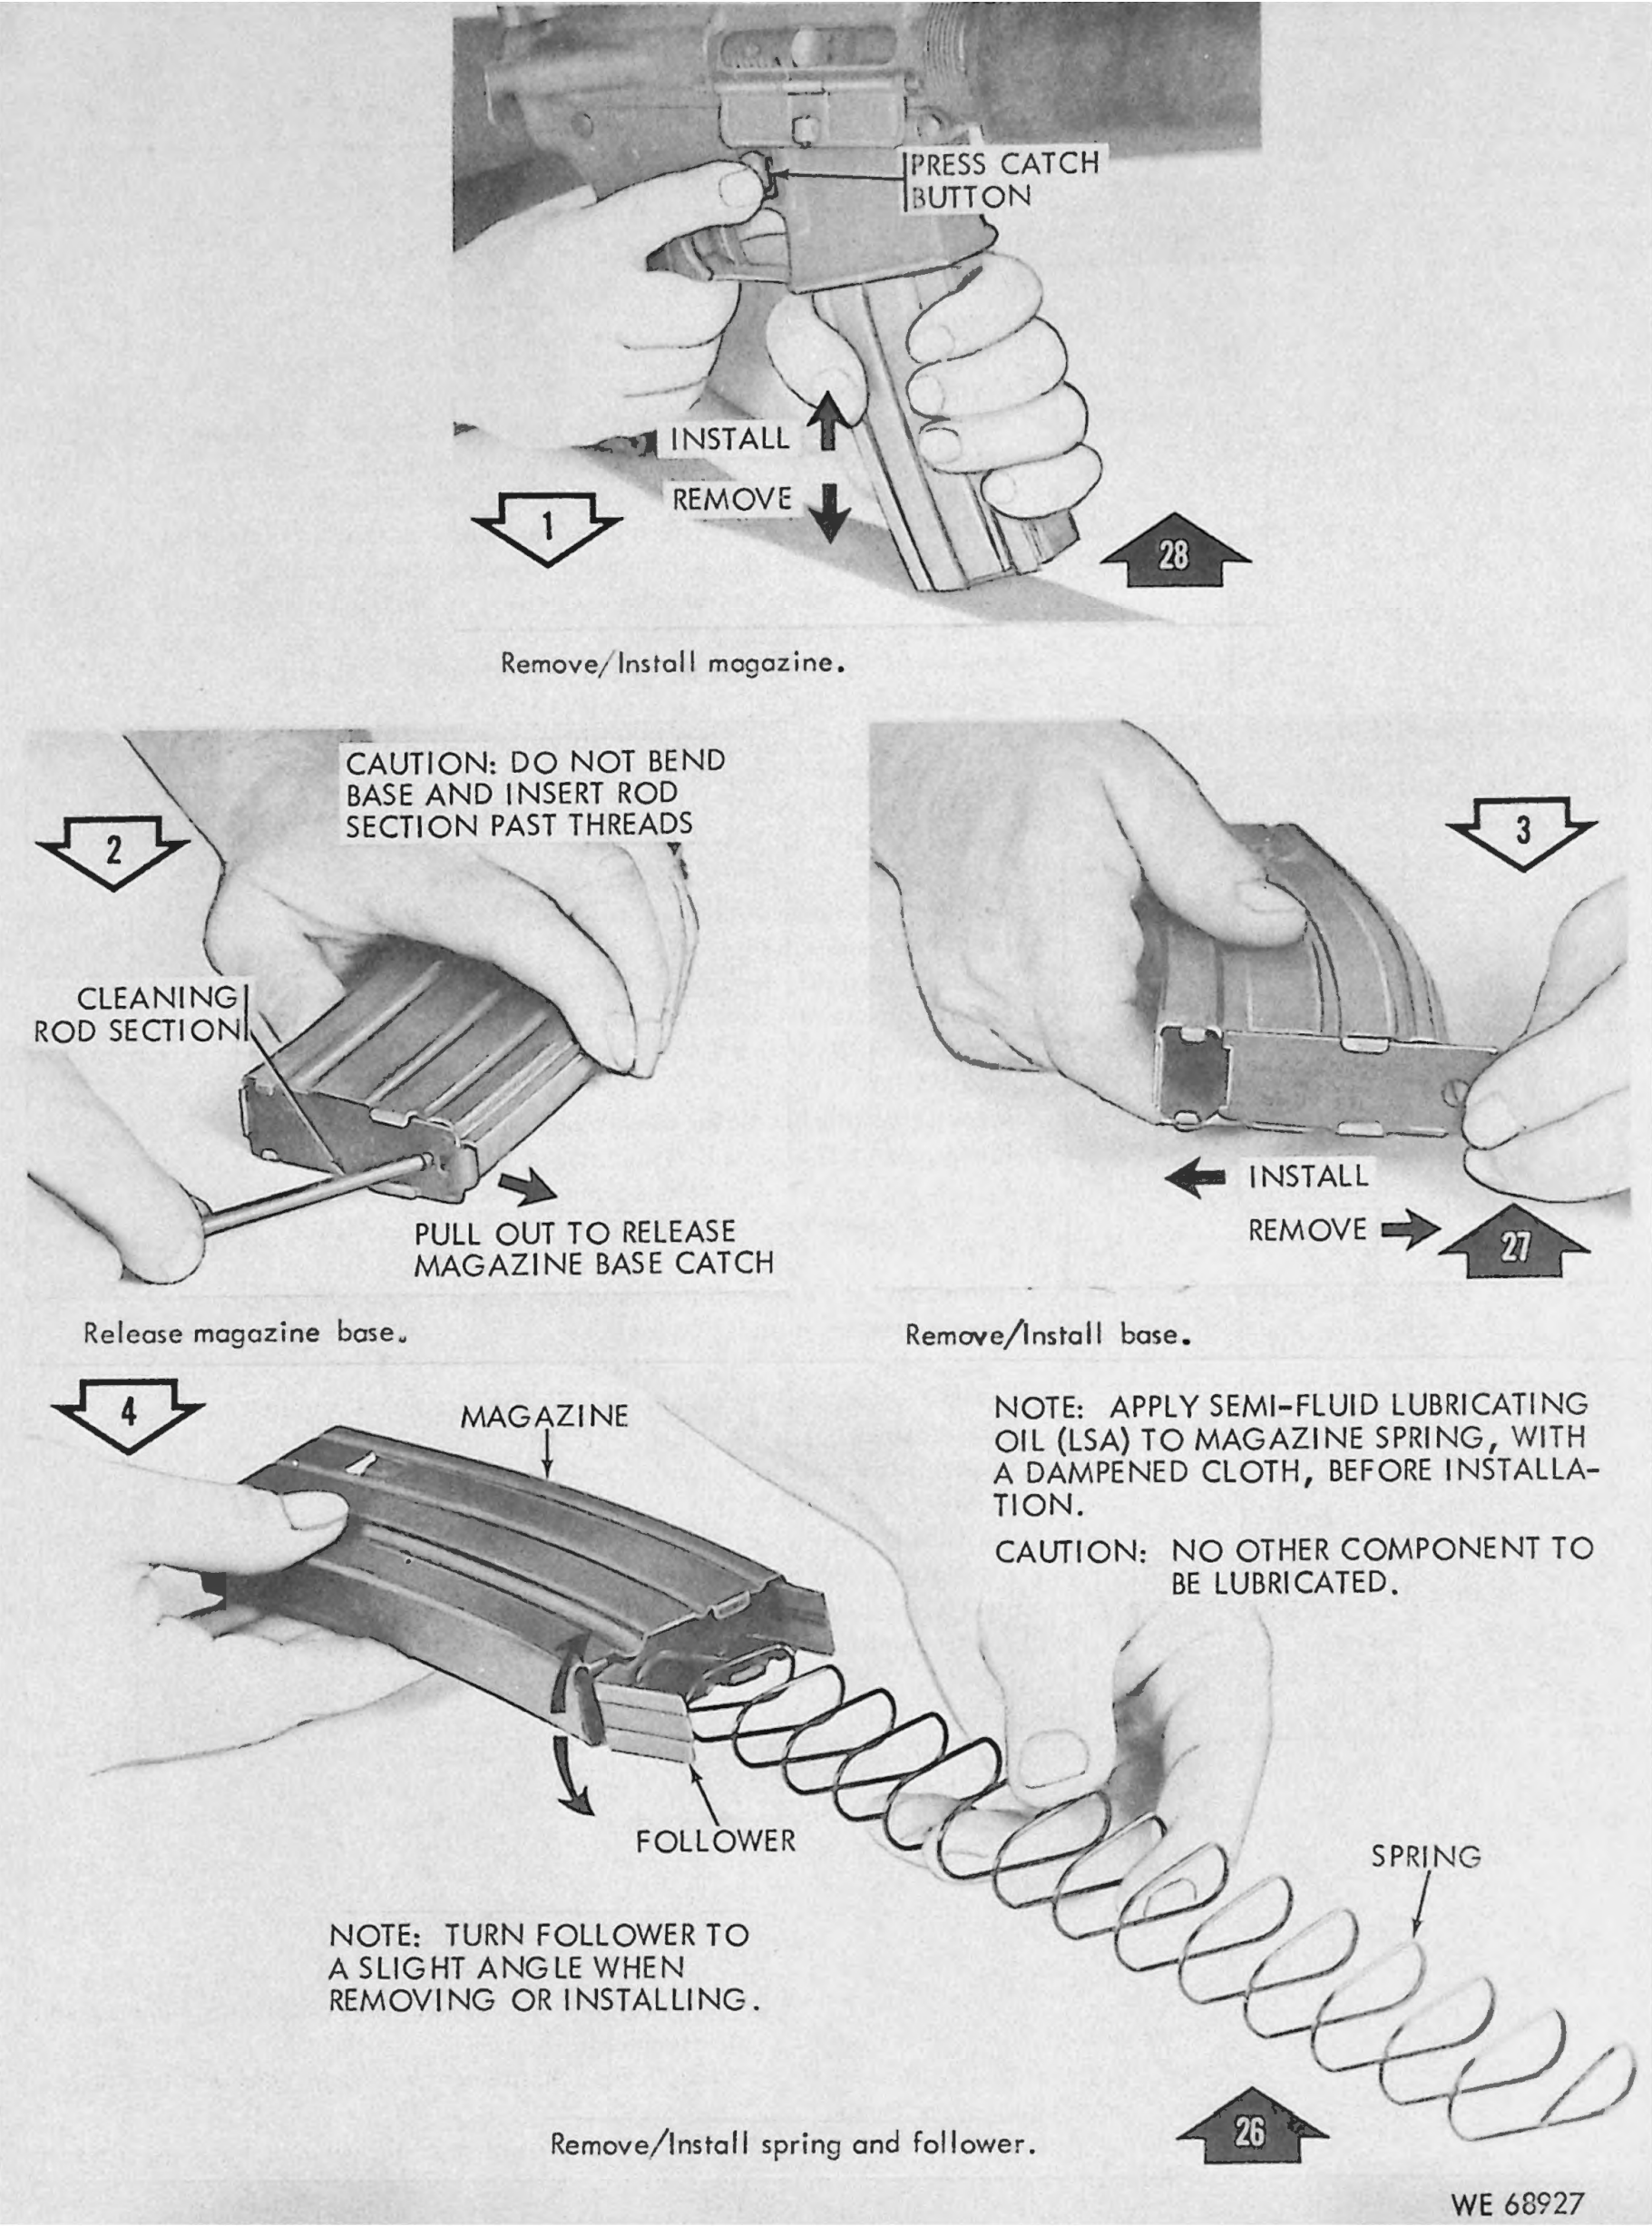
Disassembly/assembly of rifle. (1 of 8)
